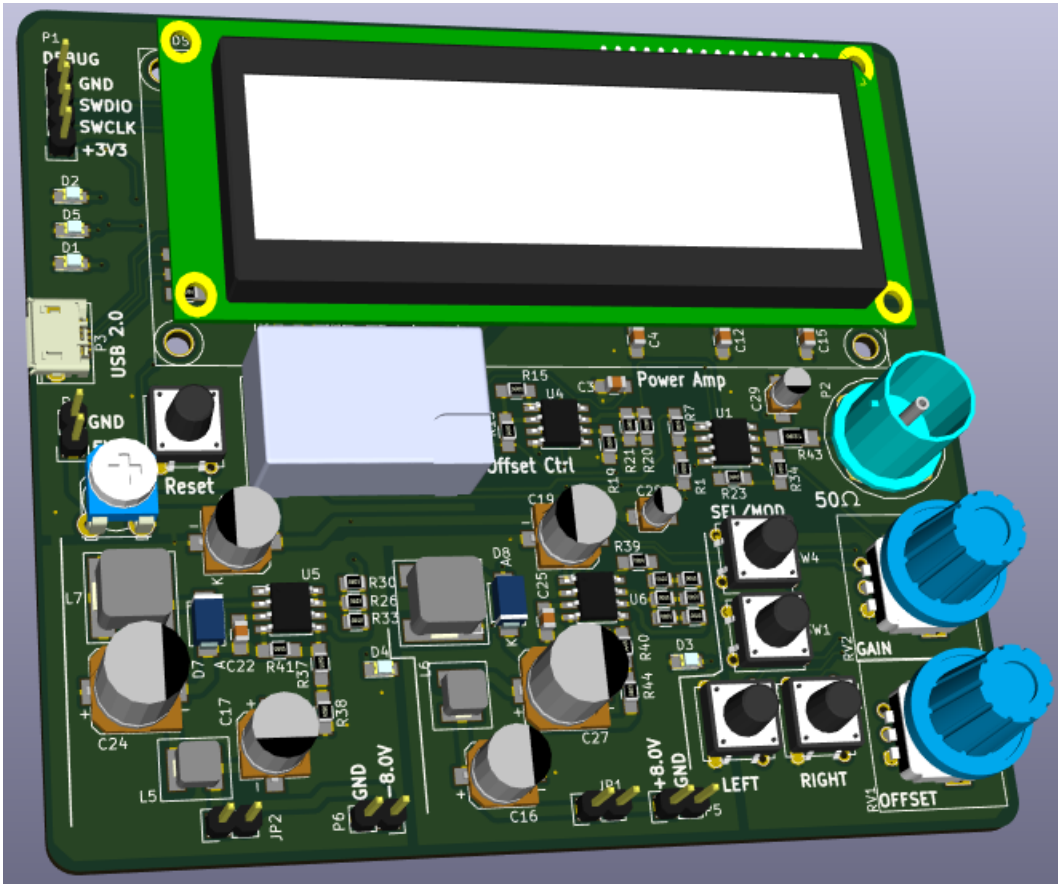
3D image of device after assembly, rendered in KiCAD
